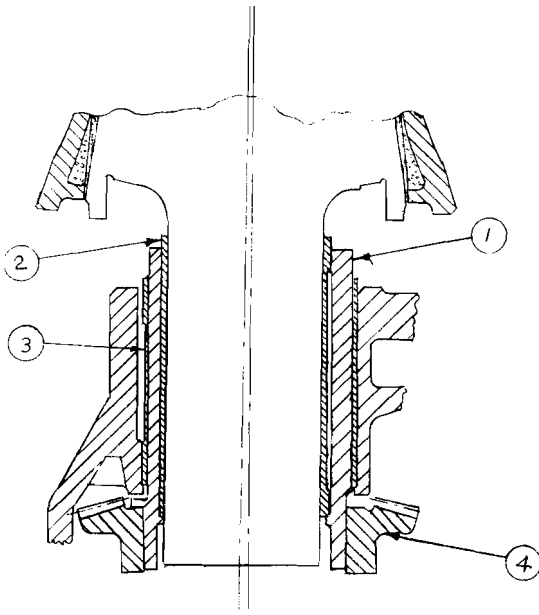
Eccentric assembly (courtesy of *Allis-Chalmers*). Legend: (1) eccentric, (2) inner wearing sleeve, (3) bronze bottom shell brushing, (4) eccentric gear.
